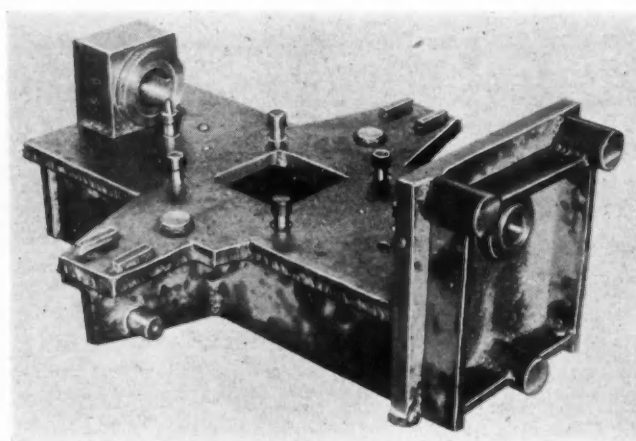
ANOTHER WELDED-STEEL FIXTURE IN PROCESS OF BUILDING
